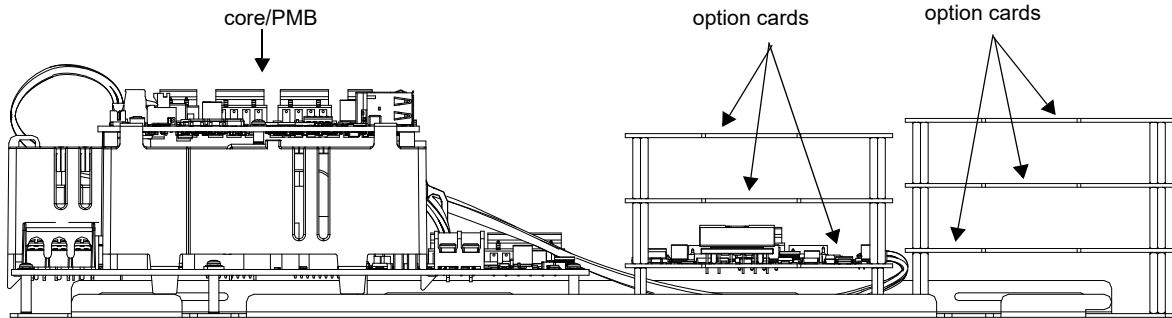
N16 Equipment Mounting Options (Shown with Stacked Option Cards)
